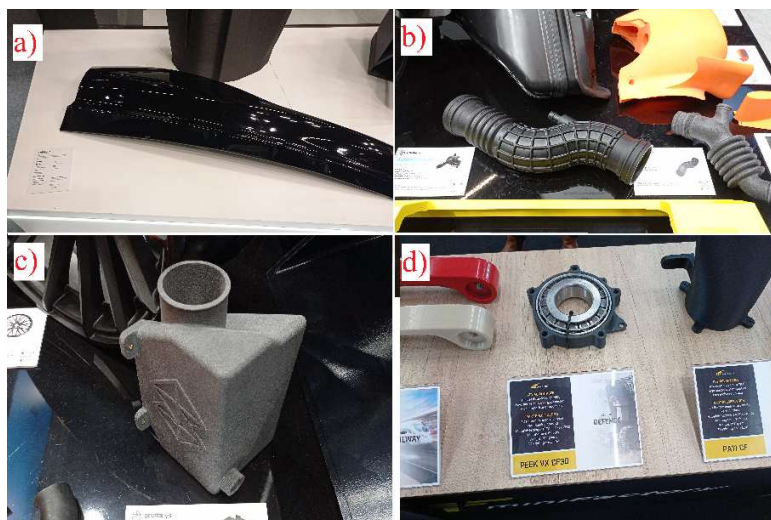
Examples of application of MEX process to produce components for automotive industry: a) vehicle body; b) elastic components; c) expansion and balancing tanks; d) mechanically exposed parts
